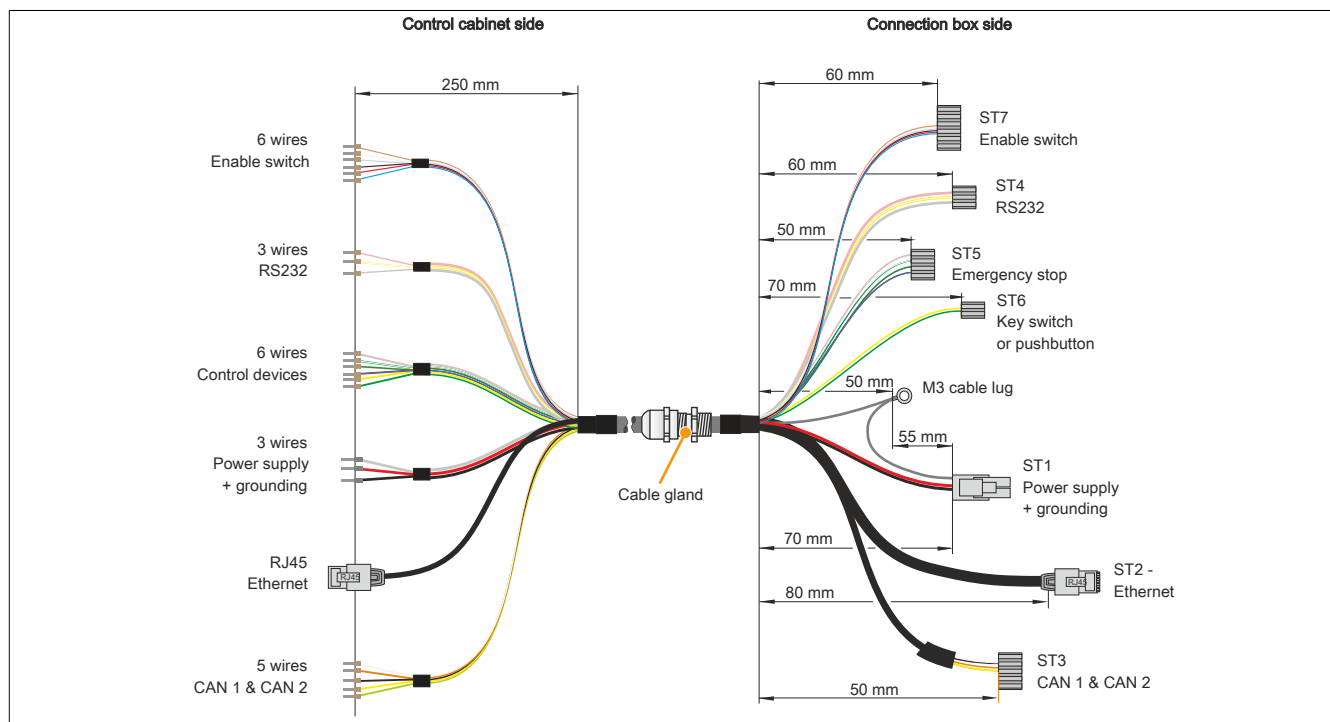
5CAMPB.0xxx-10 - Cable pinout
